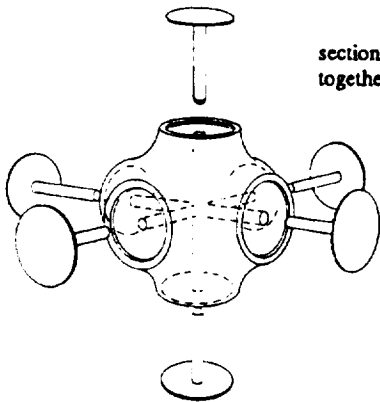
Smoothed cube with a metal skeleton formed by resistance welding six thumbtack shapes together in the center - the skeleton could also be cast-in-place
